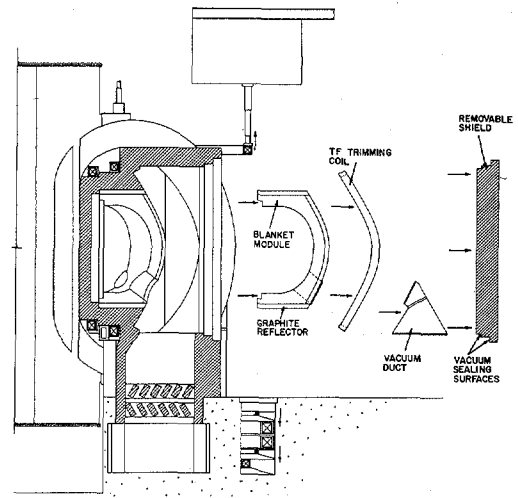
Cross Section of NUWMAK (showing internal component removal scheme)
